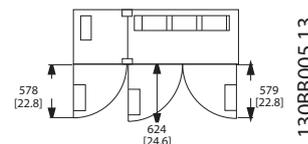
Front Clearance of IP21/IP54 Enclosure Type, Frame Size F2
